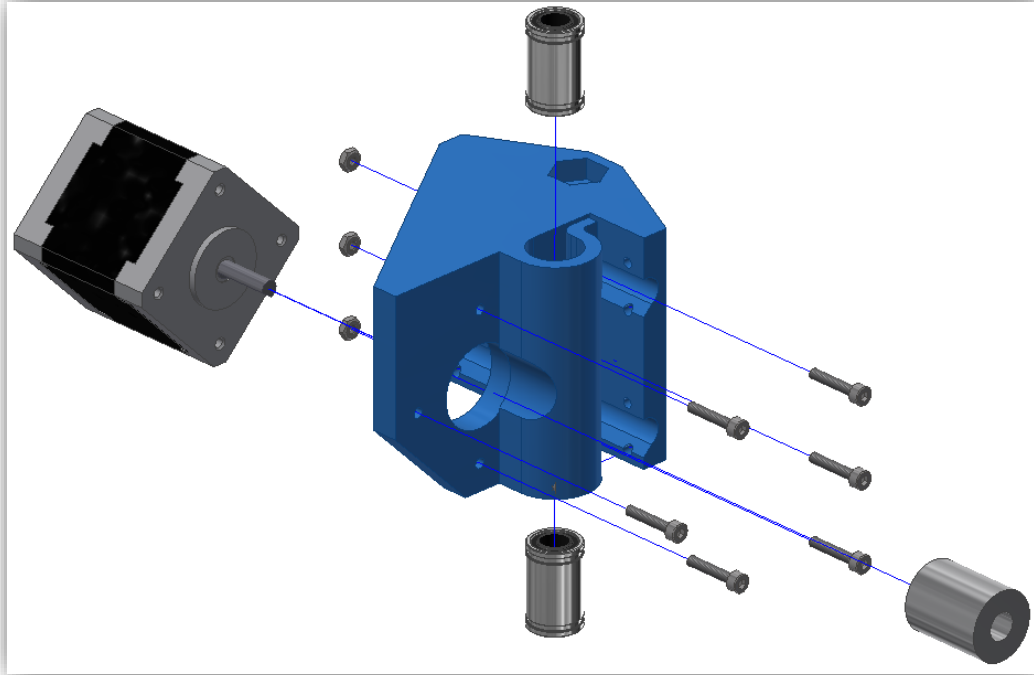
Component 1 (X axis stepper mount) exploded view.
